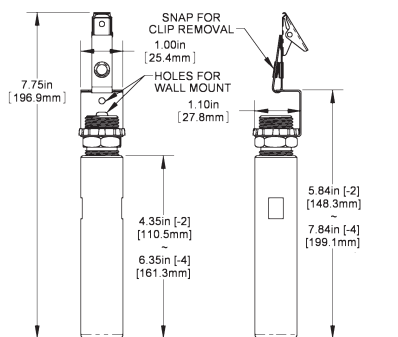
2" & 4" Hanging Bracket Thermbuffer (Transmitter is ordered and mounted separately.)
